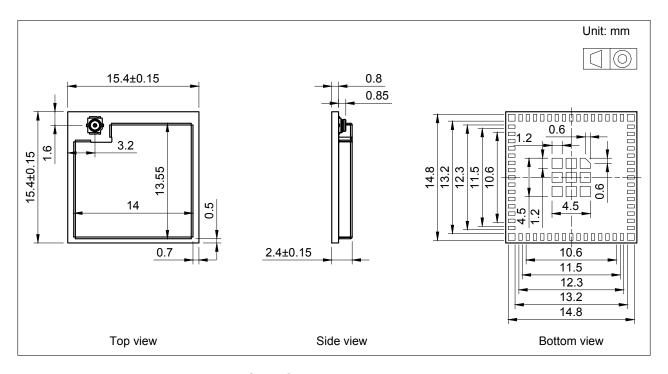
ESP32-S3-MINI-1U Physical Dimensions
